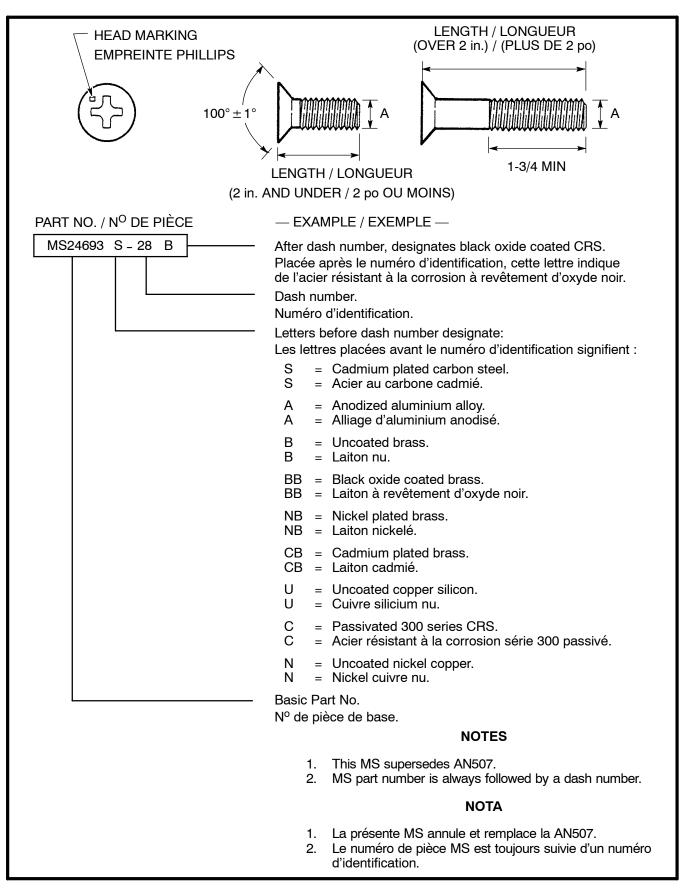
(Sheet 1 of 2) Screw, Machine, 100 Degree Countersunk, Cross-Recessed, MS24693 Figure 6-12 (feuille 1 de 2) Vis à métaux fraisées 100 degrés, cruciforme, MS24693
